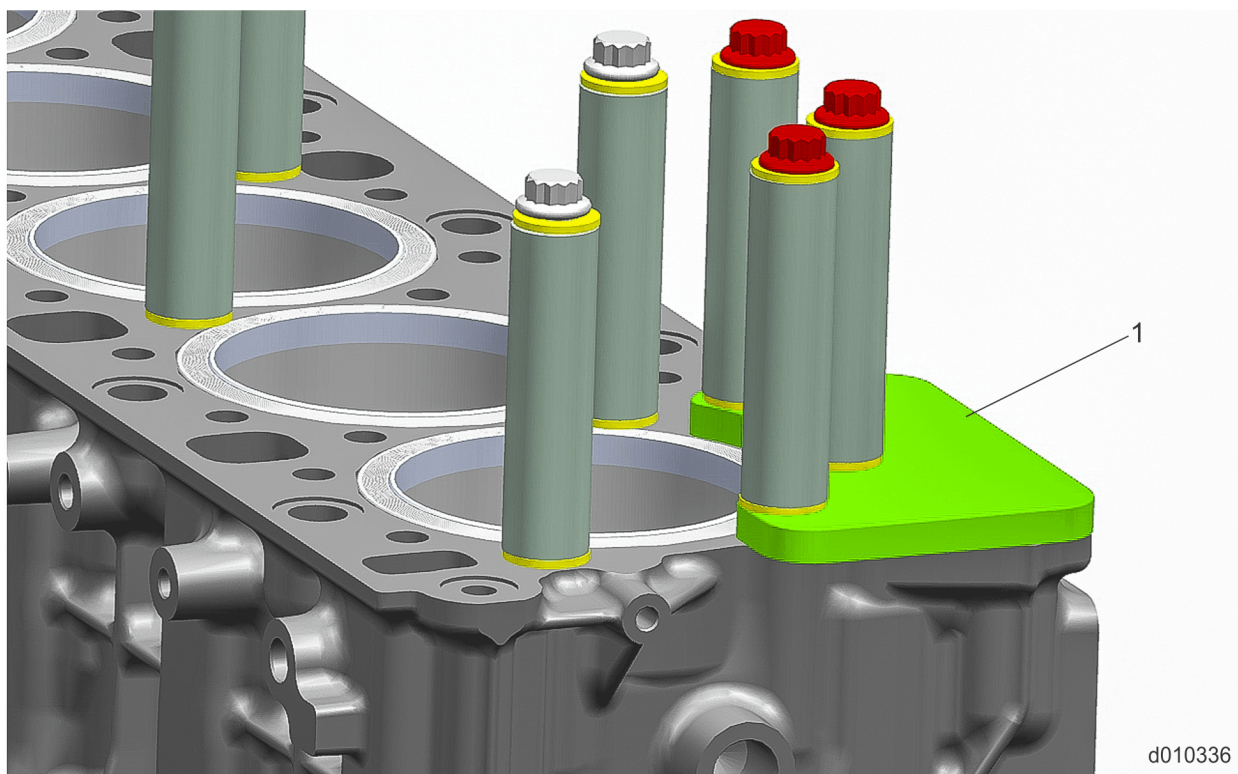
DK1470E16024-1 - Cylinder 1 Top Plate (left)
